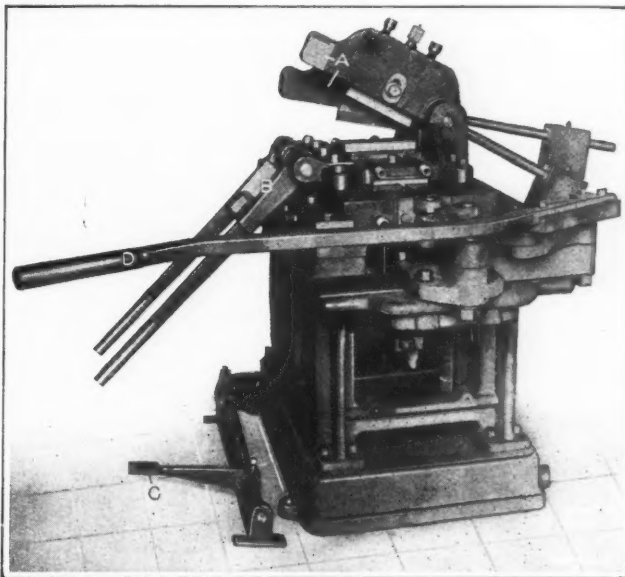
Special Type of Electric Welding Machine built by the Thomson Electric Welding Co. for welding Automobile Rims and Similar Work
